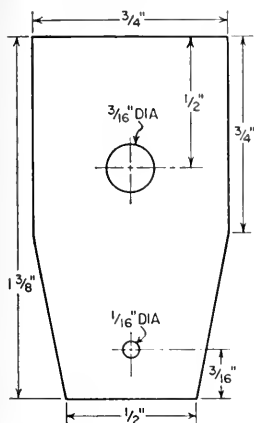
Details for making the tin plate for mounting the neutralizing capacitor.
